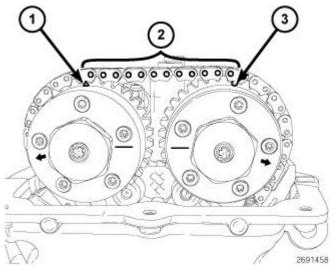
Chain Pins, Arrows, Scribe Lines, Cam Phaser Triangle Marking & Circle Marking Courtesy of CHRYSLER GROUP, LLC
